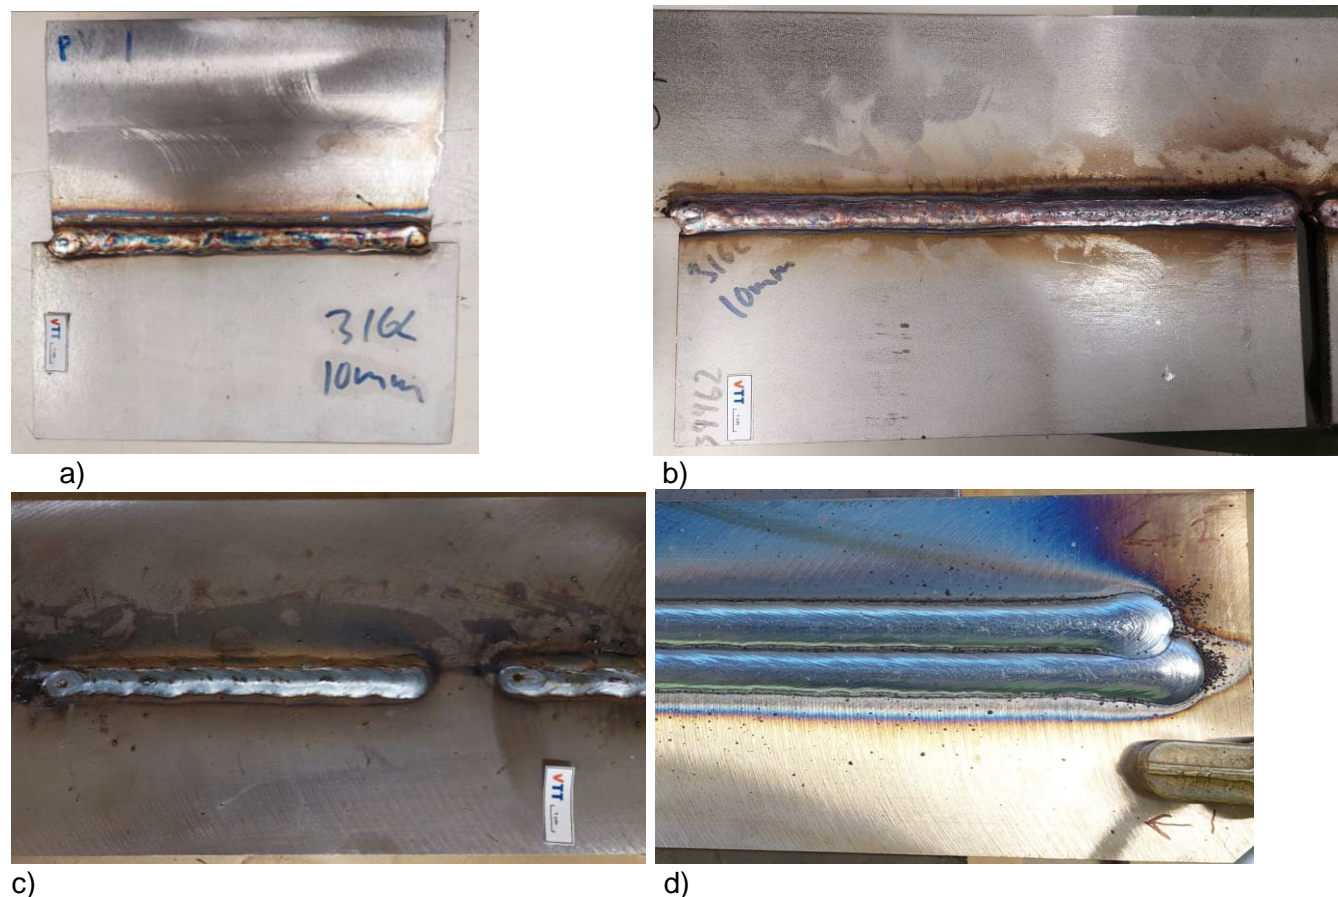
The welds produced by gas-metal-arc welds for a) PVS-316L, b) 321-316L and bead-on-plate welded Fe 37B samples with c) gas-metal-arc welding and d) submerged-arc welding.
